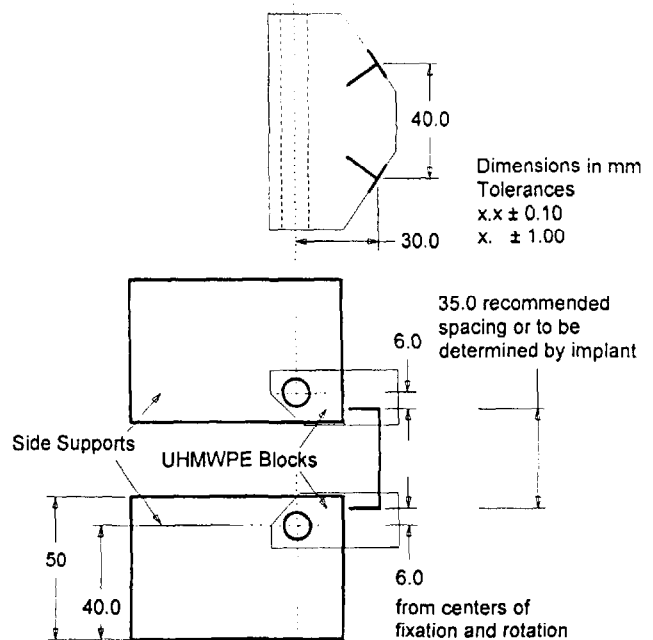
Cervical Bilateral Construct Test Setup For Screws or Bolts
